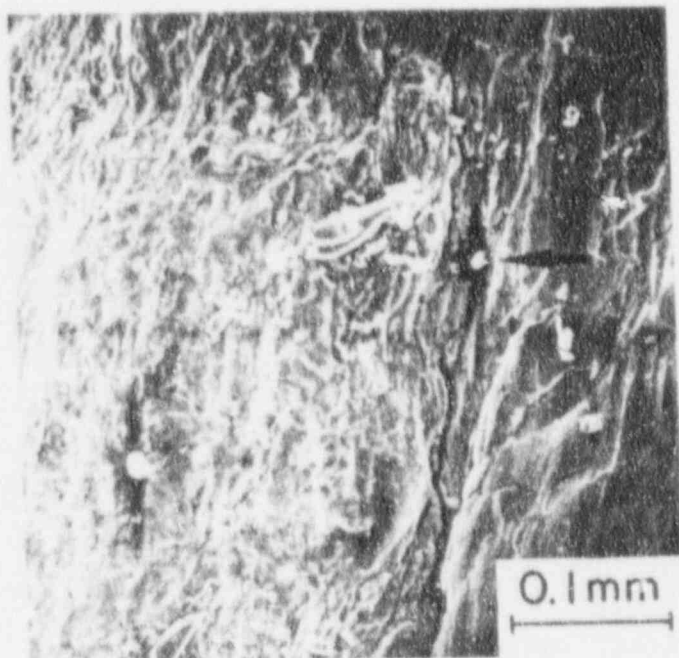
The ID surface of RBBJ-10. The machining marks (A) and fracture surface (B) are seen. The crack probably originated in a region where machine marks exist; however, the crack edge (arrow) in this figure is outside the machined region.
